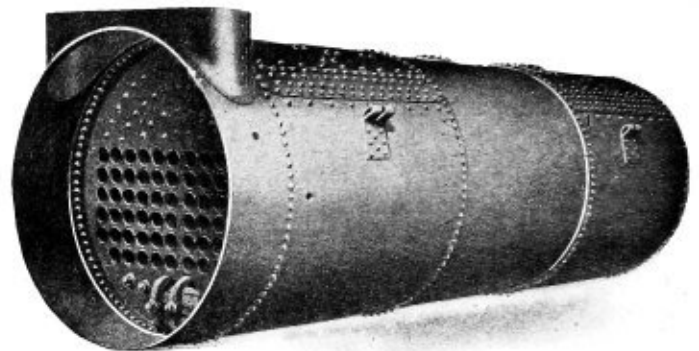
Standard Horizontal Tubular Boiler Built for 150 Pounds Working Pressure
